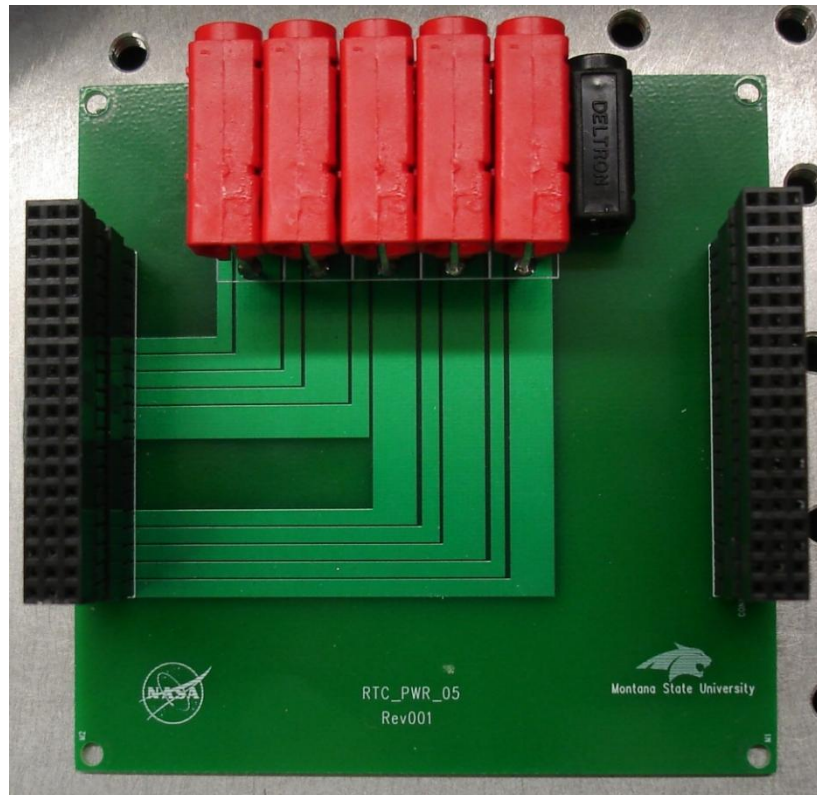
Picture of the fabricated power board. This board has the same 4 inch by 4 inch dimensions as the amplifier board.
